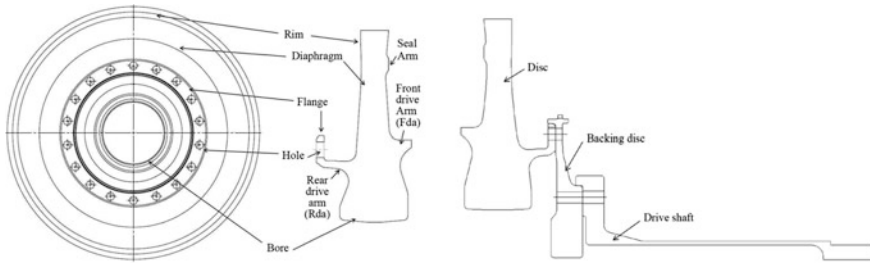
Turbine disc geometry (*left*) and test assembly including (*right*)
